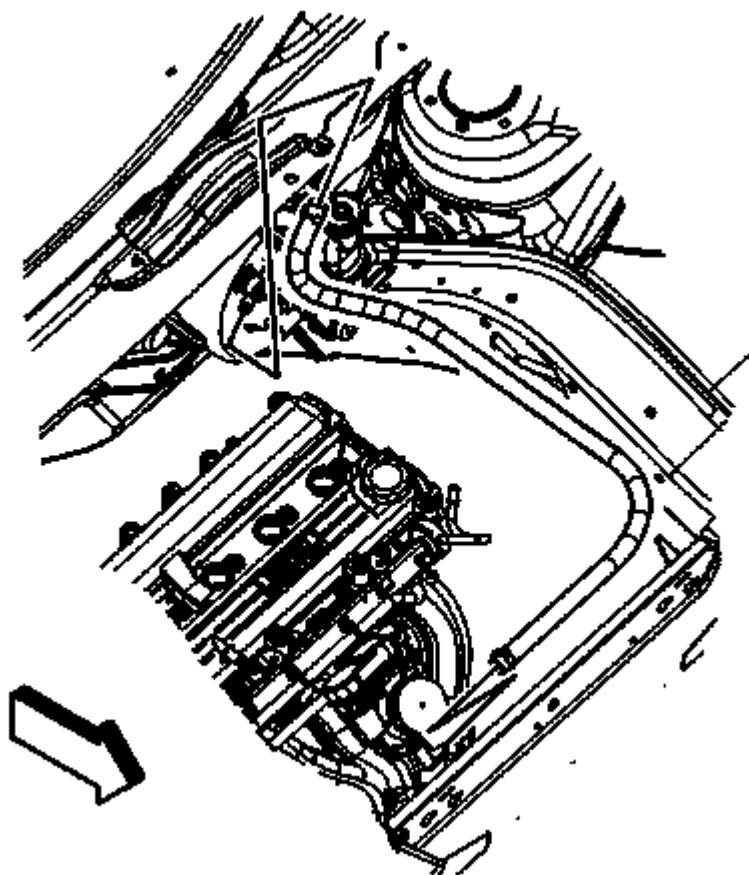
Identifying Brake Booster Vacuum Hose & Clamps
